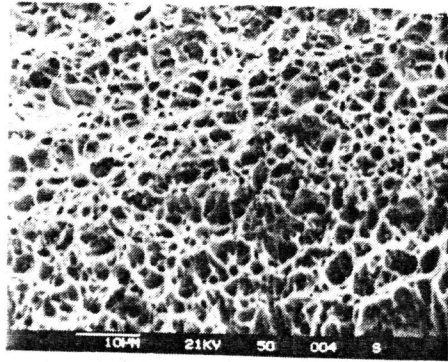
Fracture mode in weld metal of cross-weld joint sample
